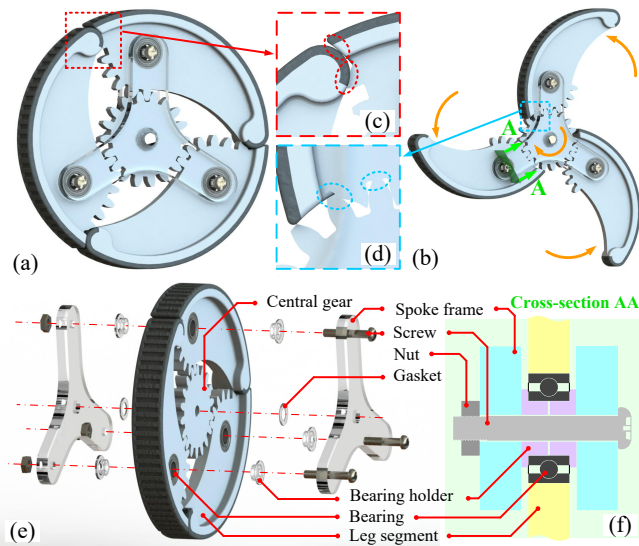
CAD drawings of WheelLeR: (a) fully closed in the wheel configuration; (b) fully opened in the leg configuration; (c) mechanical lock for closed wheel; (d) mechanical lock for opened wheel; (e) assembly exploded view; and (f) AA cross-section view.
